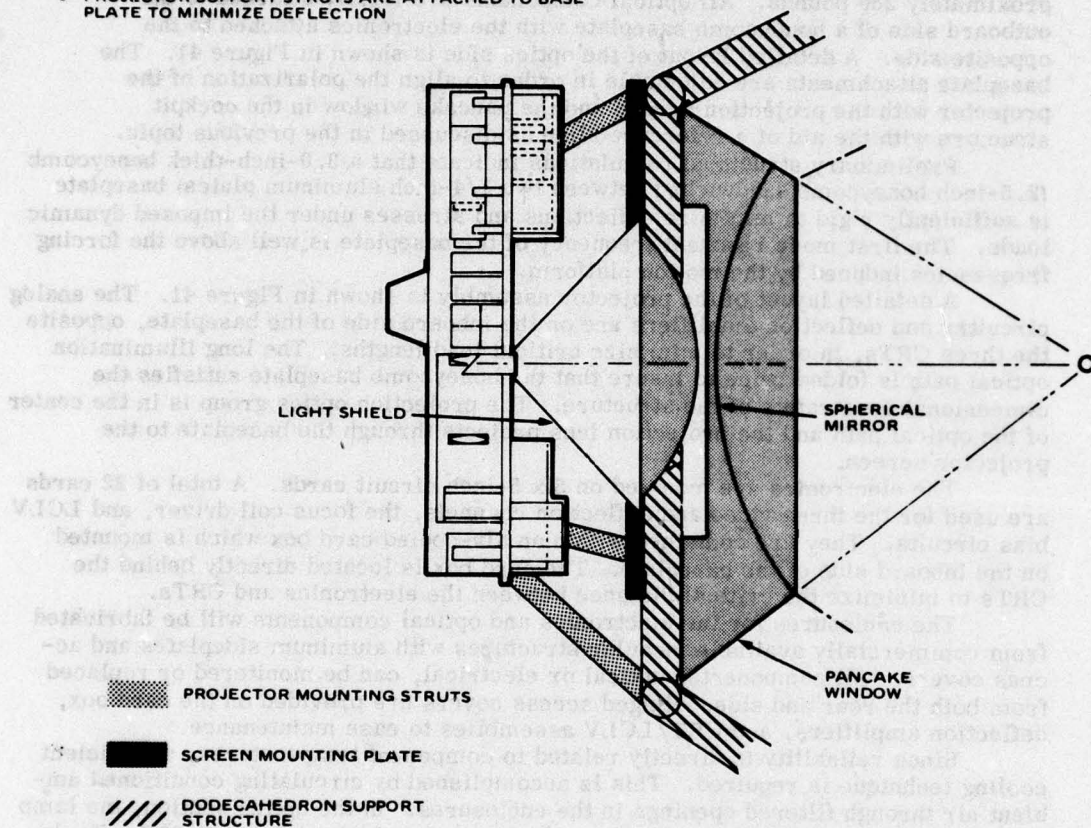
Detailed Side View of Projector Mounted to ASPT-Type Structure. Screen flange is fastened (in an alignable manner) to a flat ring rigidly mounted to the dodecahedron structure.
